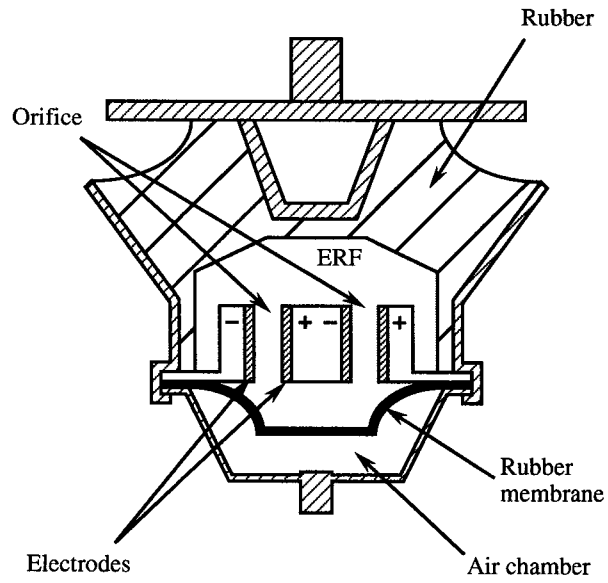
Construction of ER fluid filled tunable engine mount.
